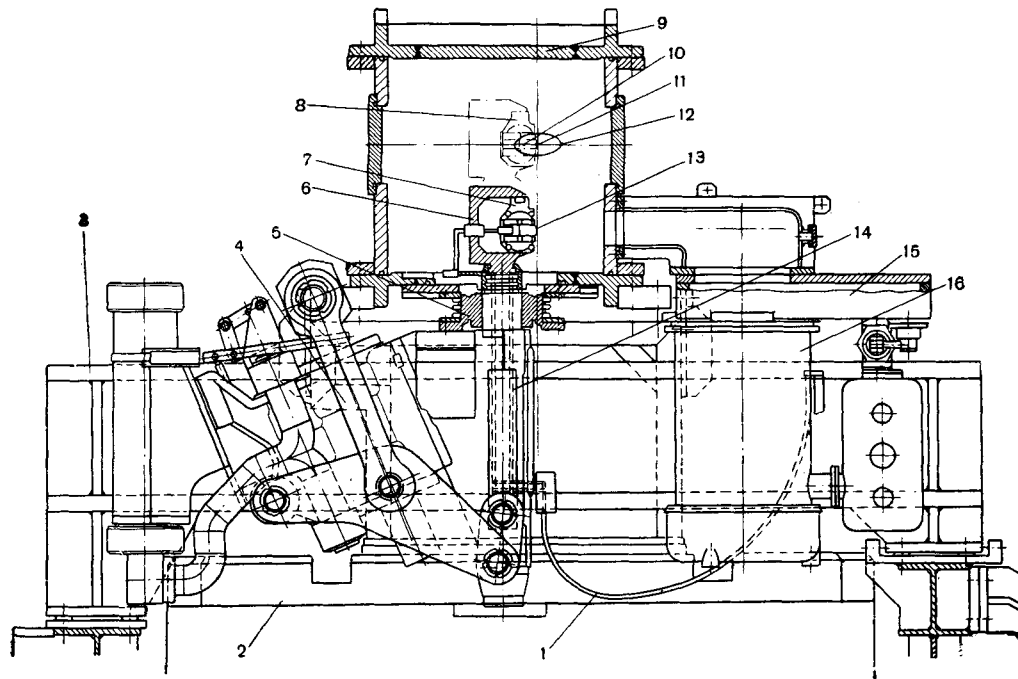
Sectional view of the bending magnet in its vacuum tank:
